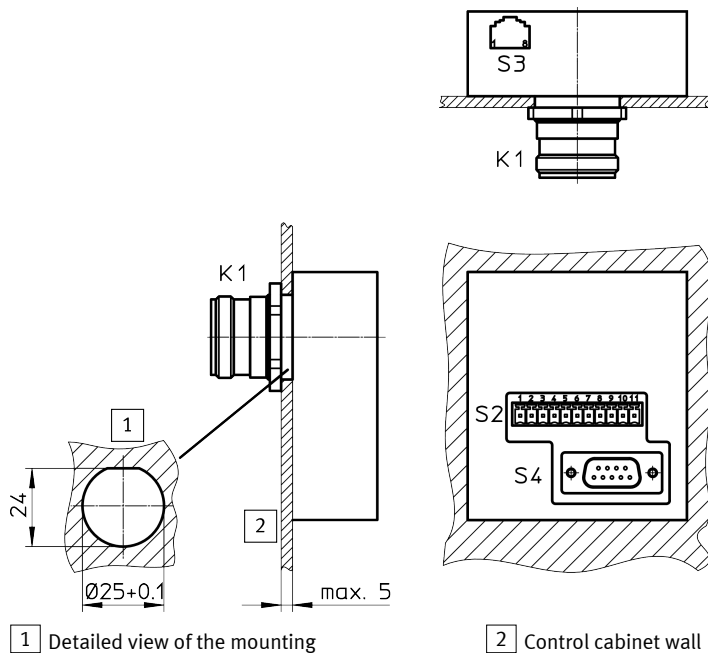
Dimensional drawing of the mounting opening for the interface housing CAMI-C
